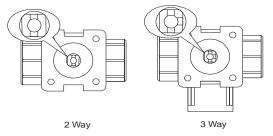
Positioning the Valve Stem -Spring Return Port A (Coil) Closed
